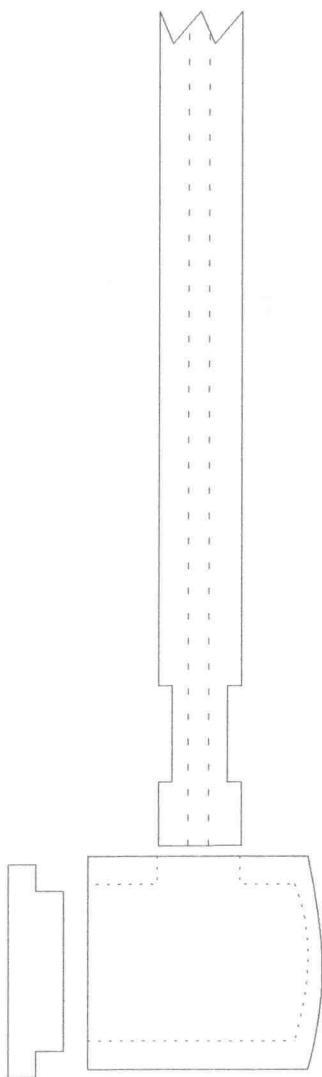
Sample cell for use with liquid sample (Assembly Drawing).
